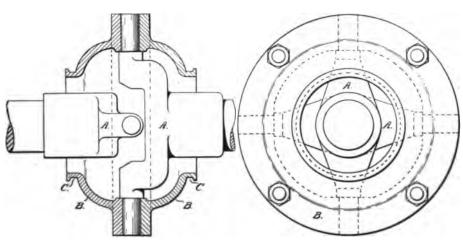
PROTECTED UNIVERSAL JOINT.
